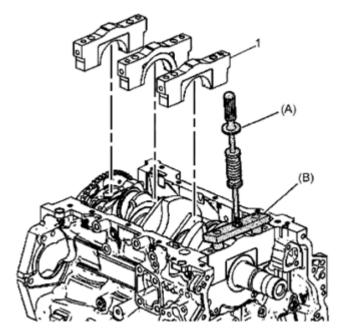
Identifying Main Bearing Caps Courtesy of SUZUKI OF AMERICA CORP.
